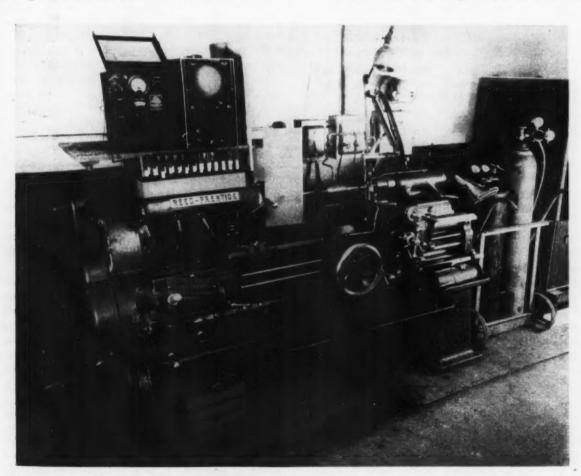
Mounted behind the headstock of this 14-in. Reed-Prentice sliding gear-head type lathe used in the machining tests can be seen the SR-4 strain indicator and the oscilloscope.
